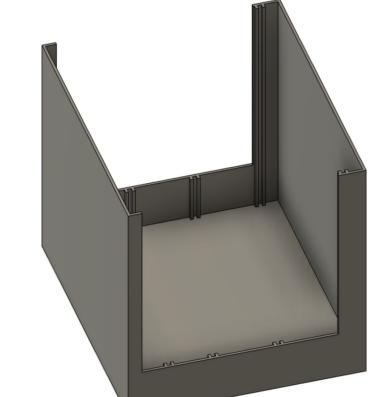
New 3D printed box for all the SBCs and PCBs except PAA board.
